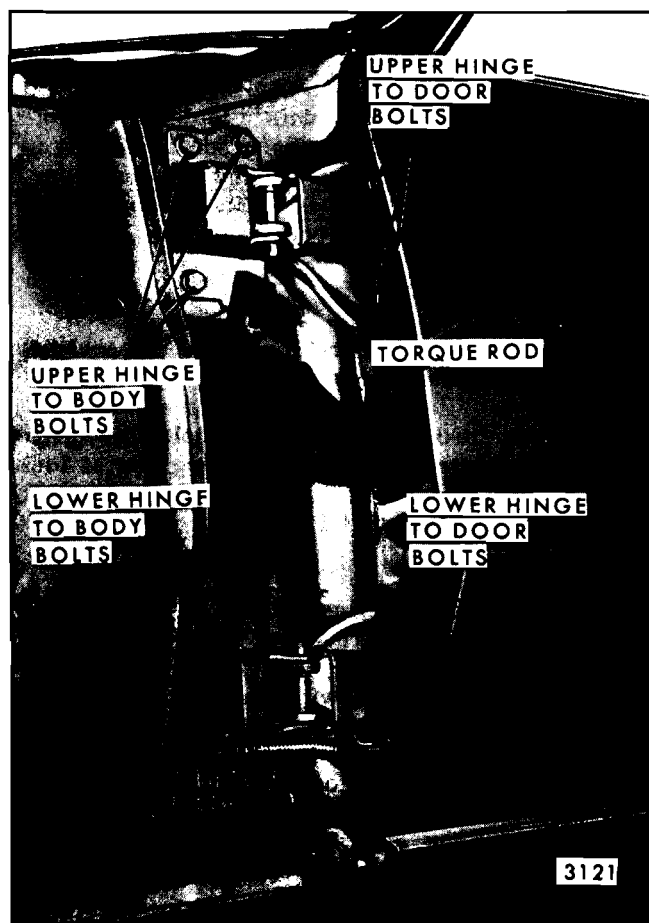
Front Door Hinge and Torque Rod Installation - "E" Styles
